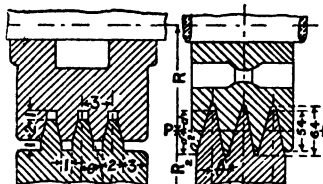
ROBERTSON'S WEDGE GEARING. CONTINENTAL TYPE
